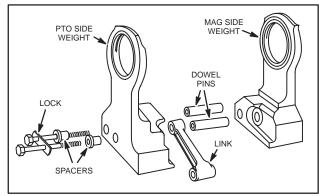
DISASSEMBLING COUNTERWEIGHT
